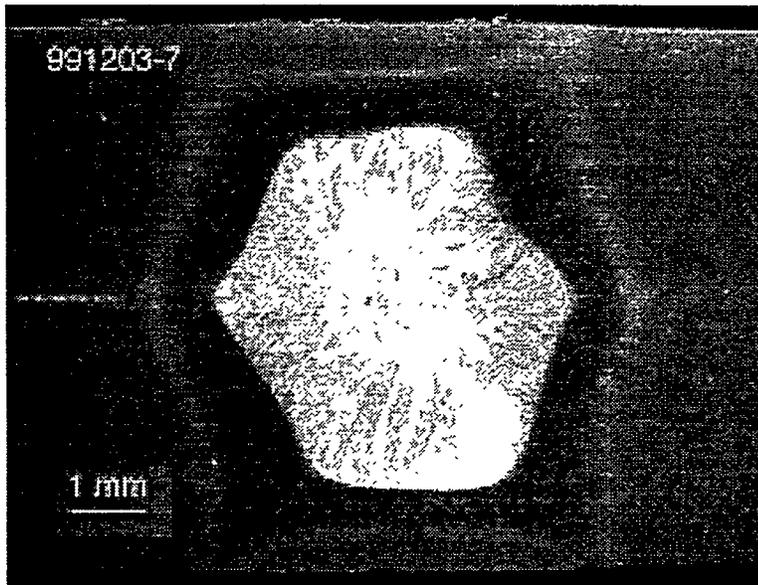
Cross section view of resistance weld of V-4Cr-4Ti alloy (Test No. 991203-7 in Table 1) showing extensive restructuring zone (white area)
